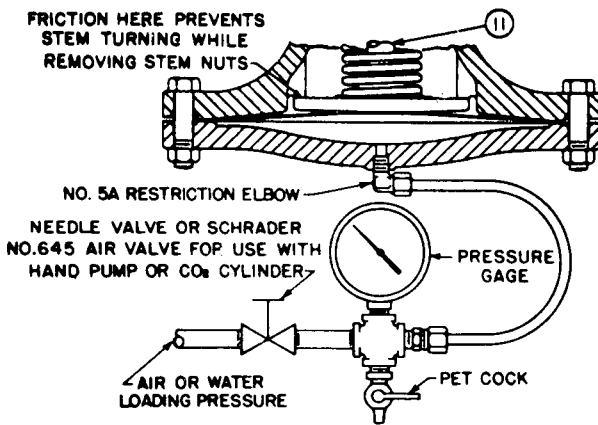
AIR LOADING ARRANGEMENT FOR REMOVING STEM NUTS
